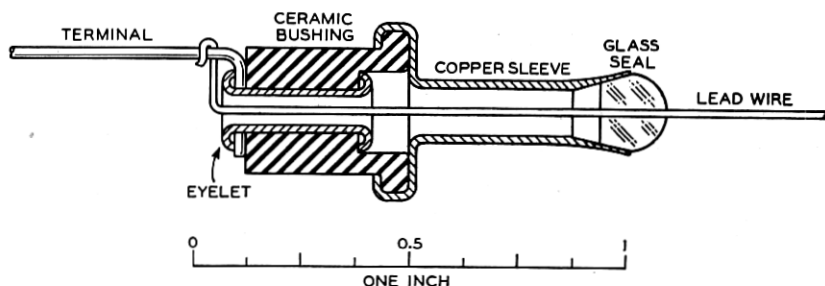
Terminal used in hermetically sealed filters. The copper sleeve, bonded to the lead wire by means of an insulating glass bead, is soldered into the container of the filter in final assembly.
